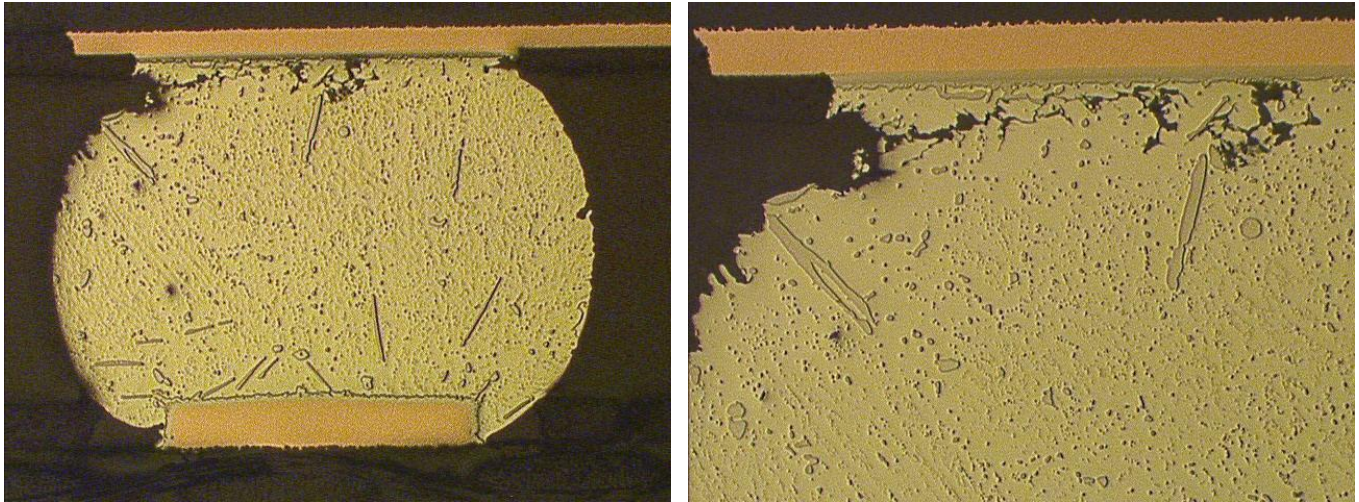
Reworked PBGA-225 Solder Joints, Board 127, Component U56, Initially SAC305/SAC405, 1 rework Flux Only/SAC405, Failed @ 2349 Cycles
